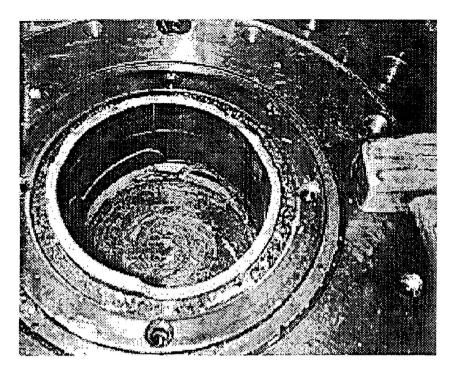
View of Pump Shaft Fracture looking down on Auxiliary Seal Flange
